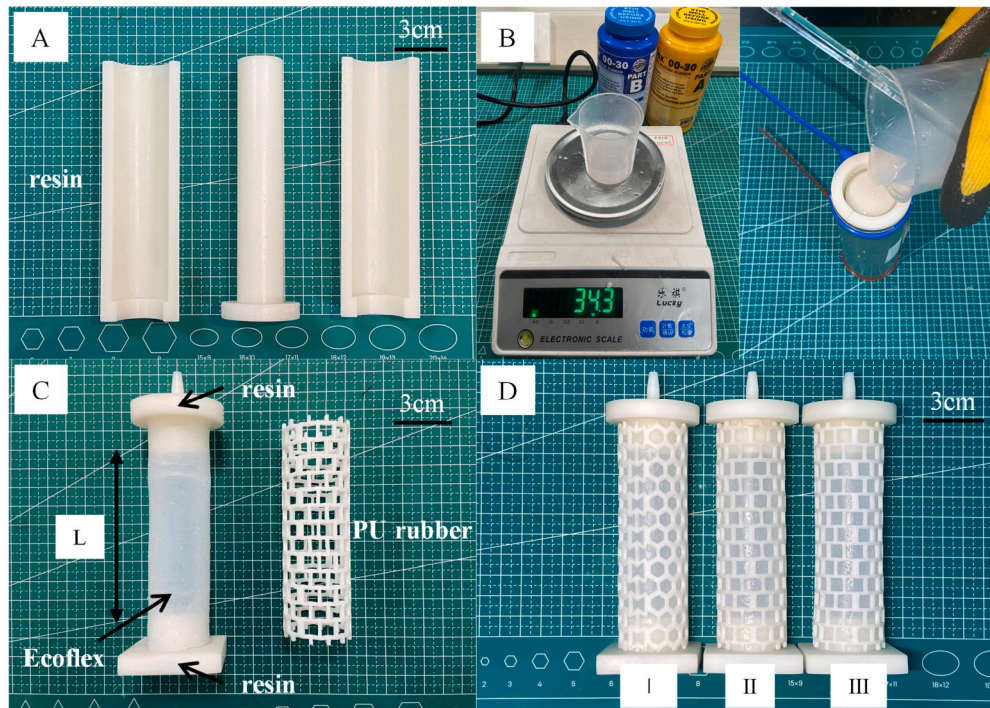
Fabrication of the auxetic metamaterial-enabled soft bending actuator. (A) 3D printed resin mold for the fabrication of the inner soft tube. (B) Ecoflex 00-30 A and B are mixed and poured into the mold for curing. (C) The cured soft tube is inserted with 3D-printed components at both ends to create an enclosed pneumatic actuator. The robotic skin is fabricated using a separate injection molding process, utilizing polyurethane (PU)-based rubber as the raw material. (D) The soft tube and the robotic skin are adhered together to produce a bending actuator. Three specimens are characterized by different geometric parameters.
